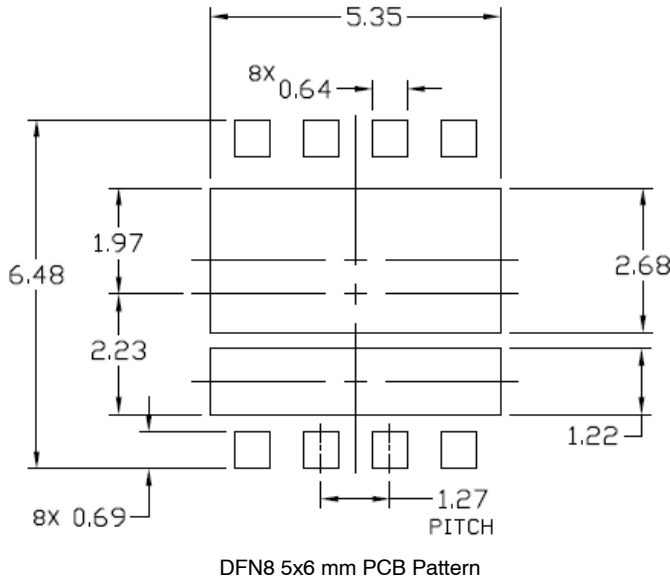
Printed Circuit Board Layout using Non-Solder Masked Defined Pads
